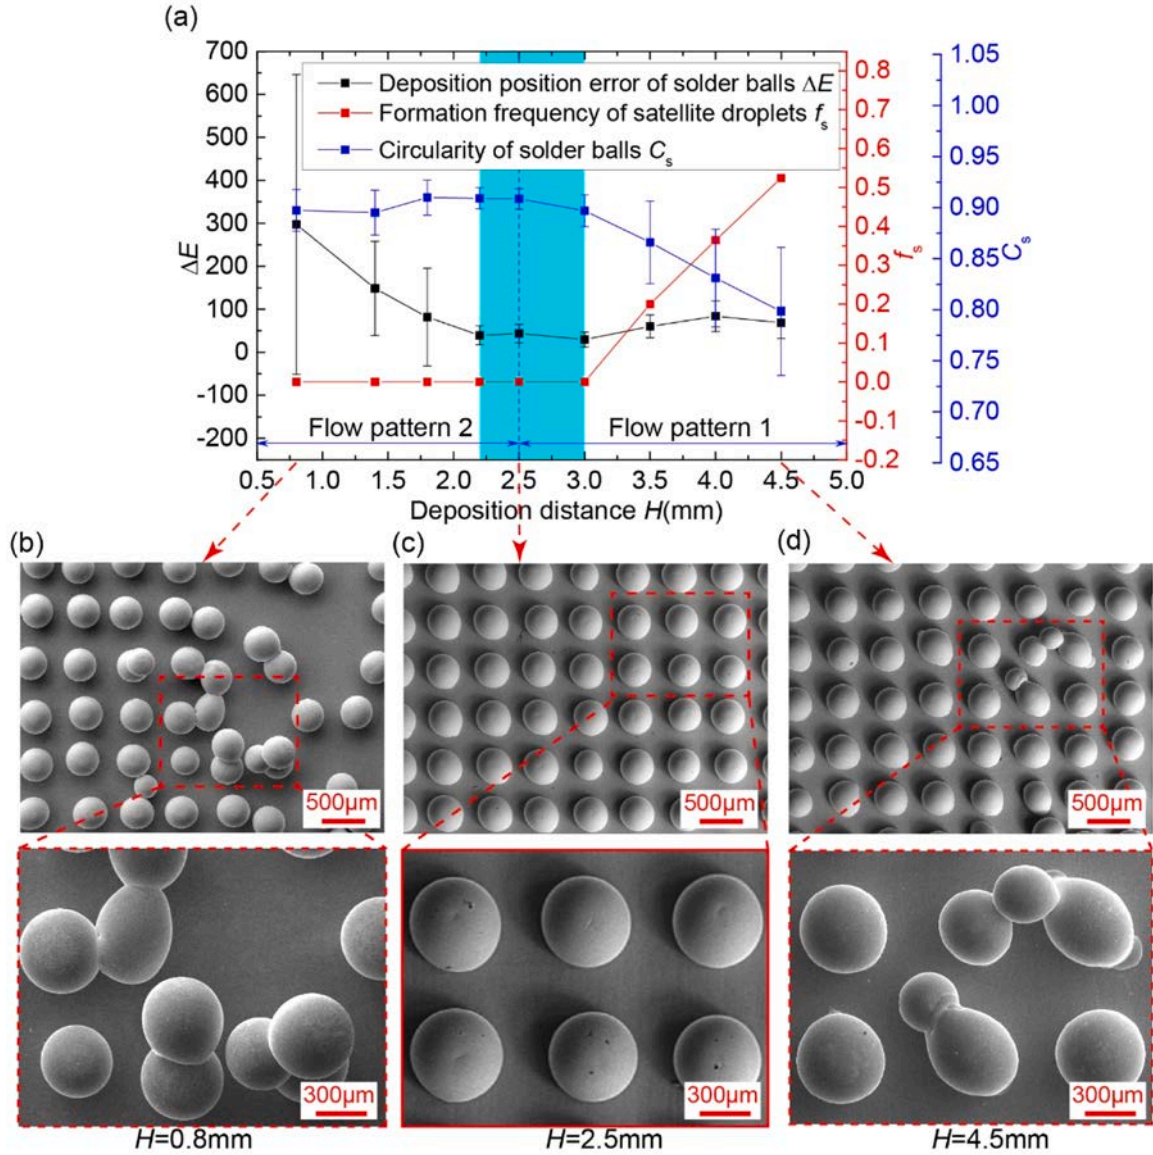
(a) Deposition position error of solder balls, formation frequency of satellite droplets, and circularity of solder balls in 15×15 solder ball arrays printing. SEM images of the solder ball arrays with (b) $H=0.8$ mm, (c) $H=2.5$ mm, and (d) $H=4.5$ mm, respectively.
